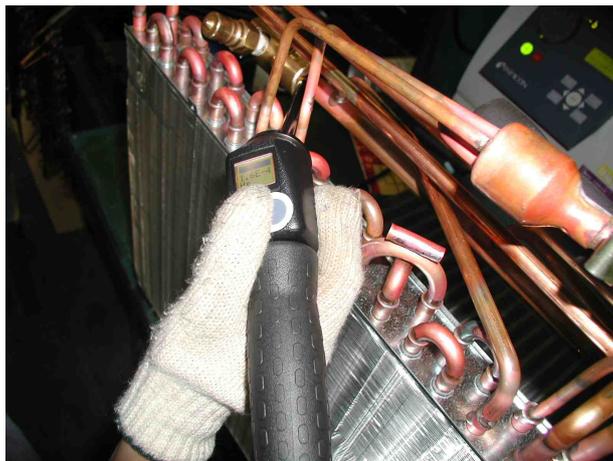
Sniffer probing a complicated assembly of a heat exchanger with a great number of soldered joints
